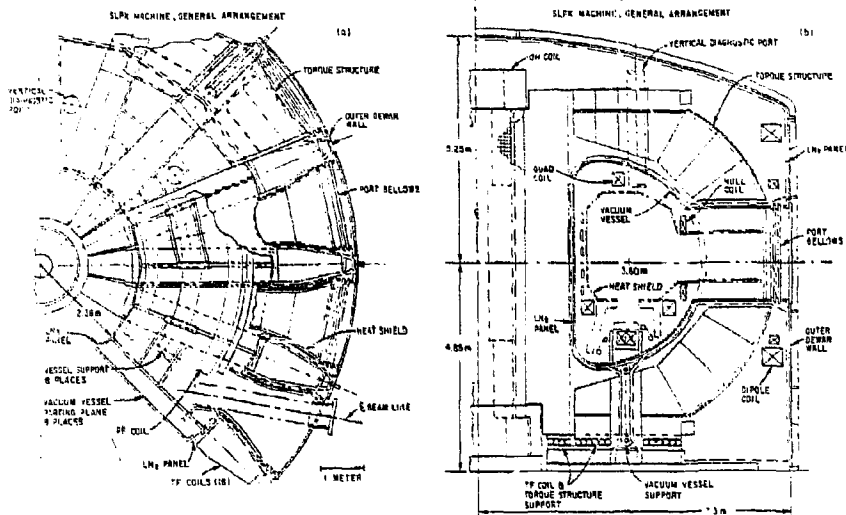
(a) Plan and (b) elevation views of the SLPX-I machine. (78-6051)
